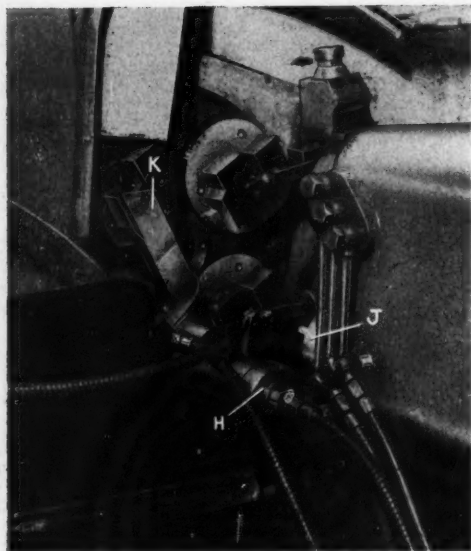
Close-up view of the twin-spindle Mollart machine shown in Fig. 11
